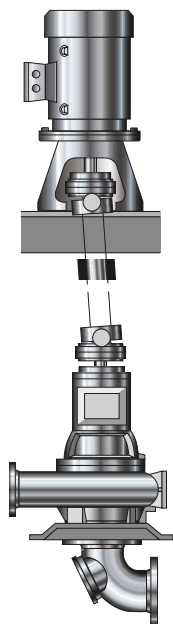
Sewatec - vertical (VGW): Pump set with soleplate for pump and motor, support frame, drive lantern, suction elbow and universal-joint shaft
